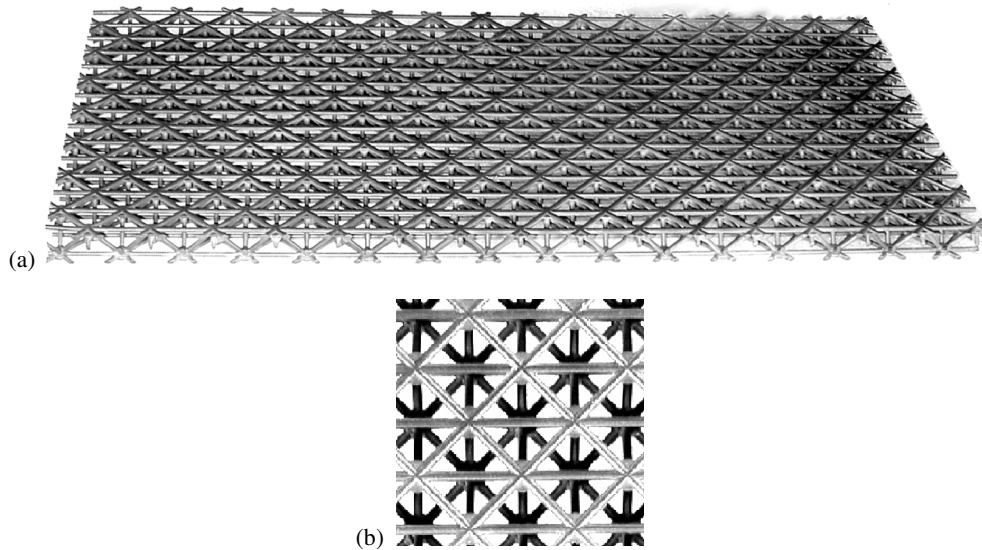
IN718 lattice block panel 5 after removal of peripheral casting gates; (a) size is 131 mm by 290 mm by 11 mm, (b) enlarged top view shows nodal reinforcement.
